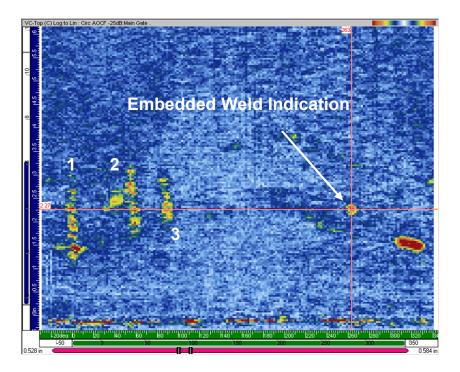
Indication in the Weld at 263 Degrees in Nozzle 4
